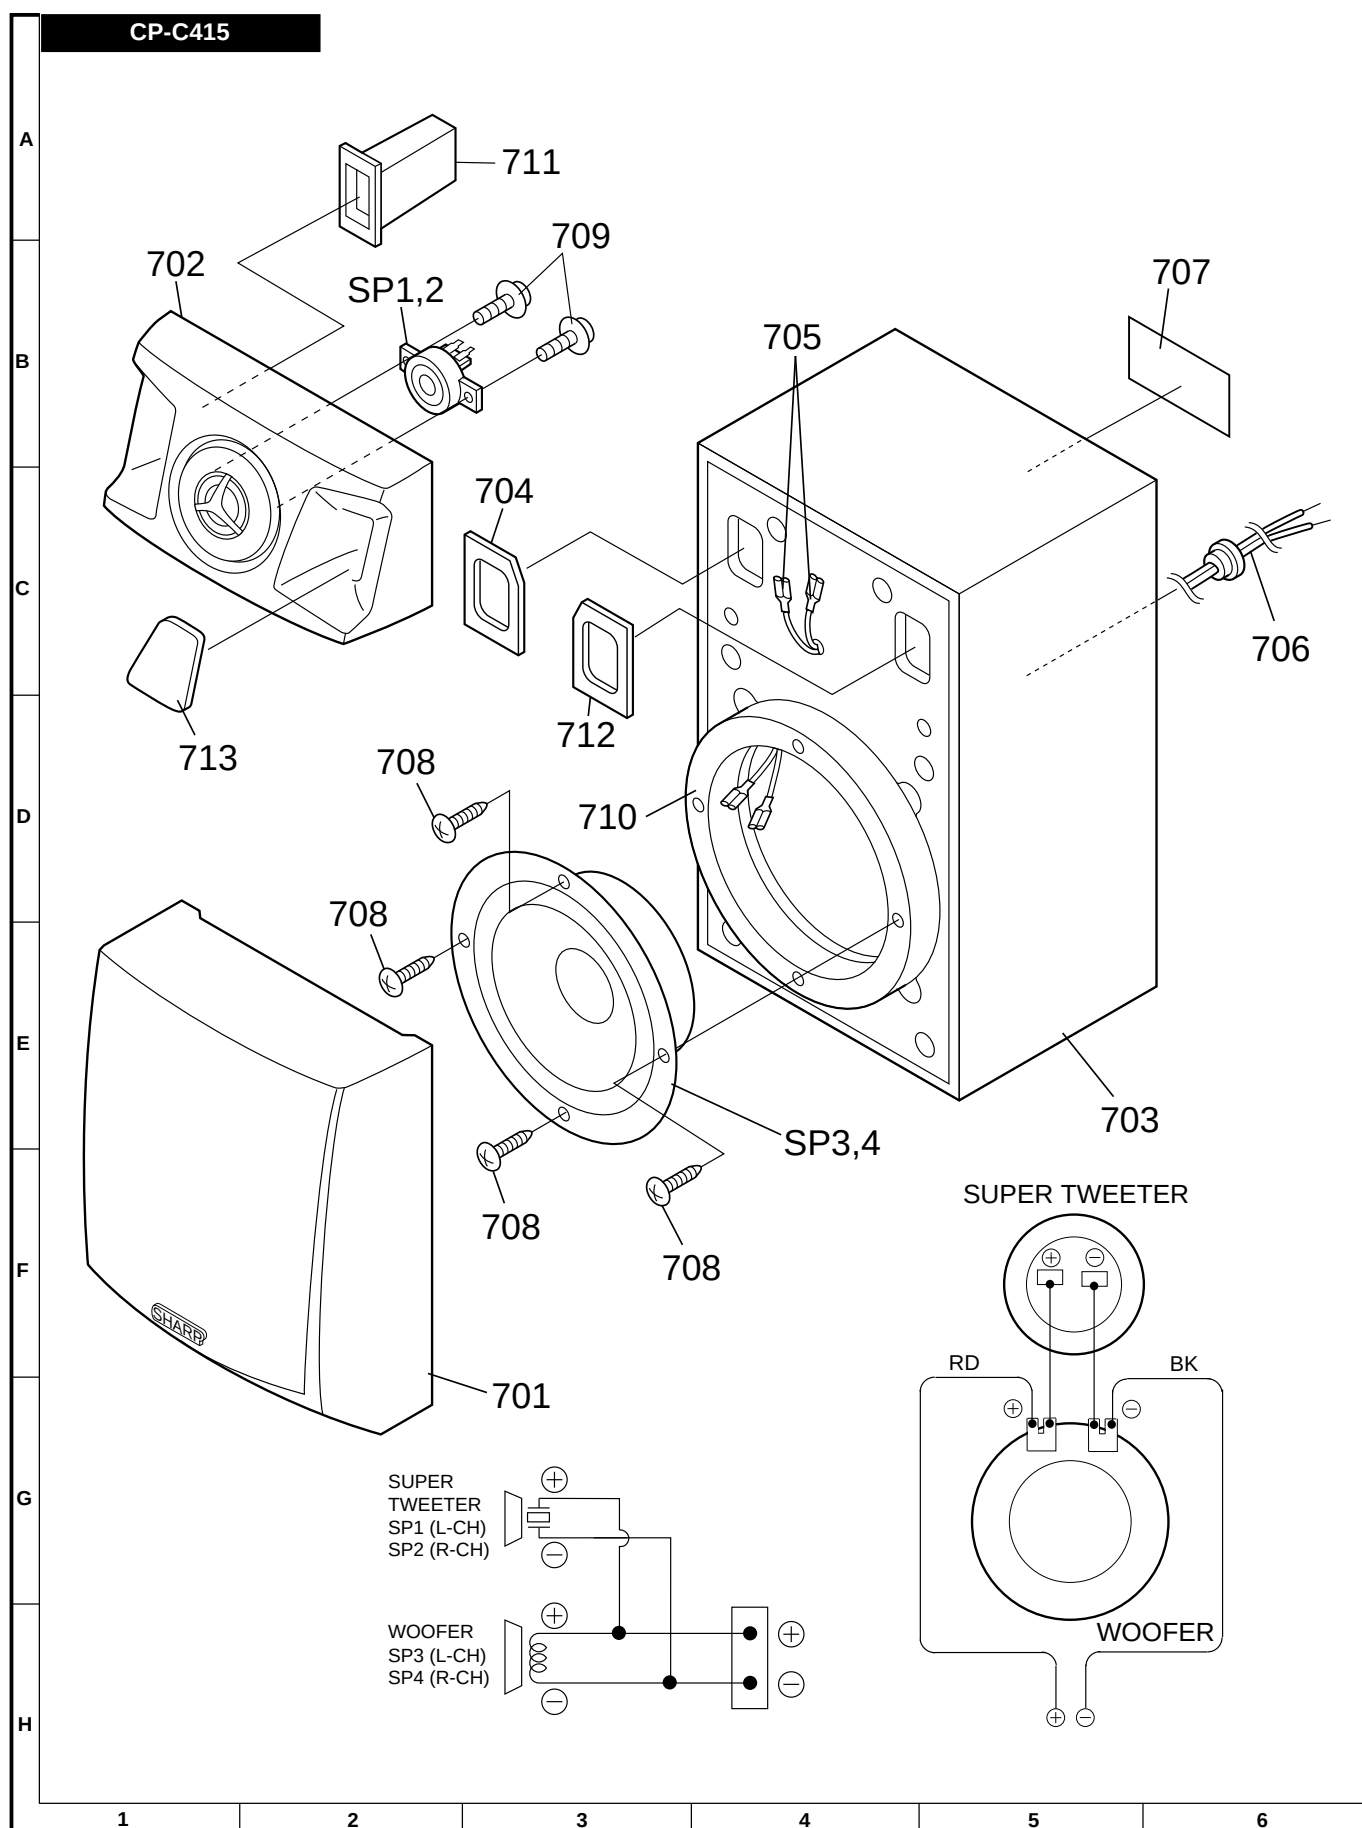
SPEAKER EXPLODED VIEW (3/3)
